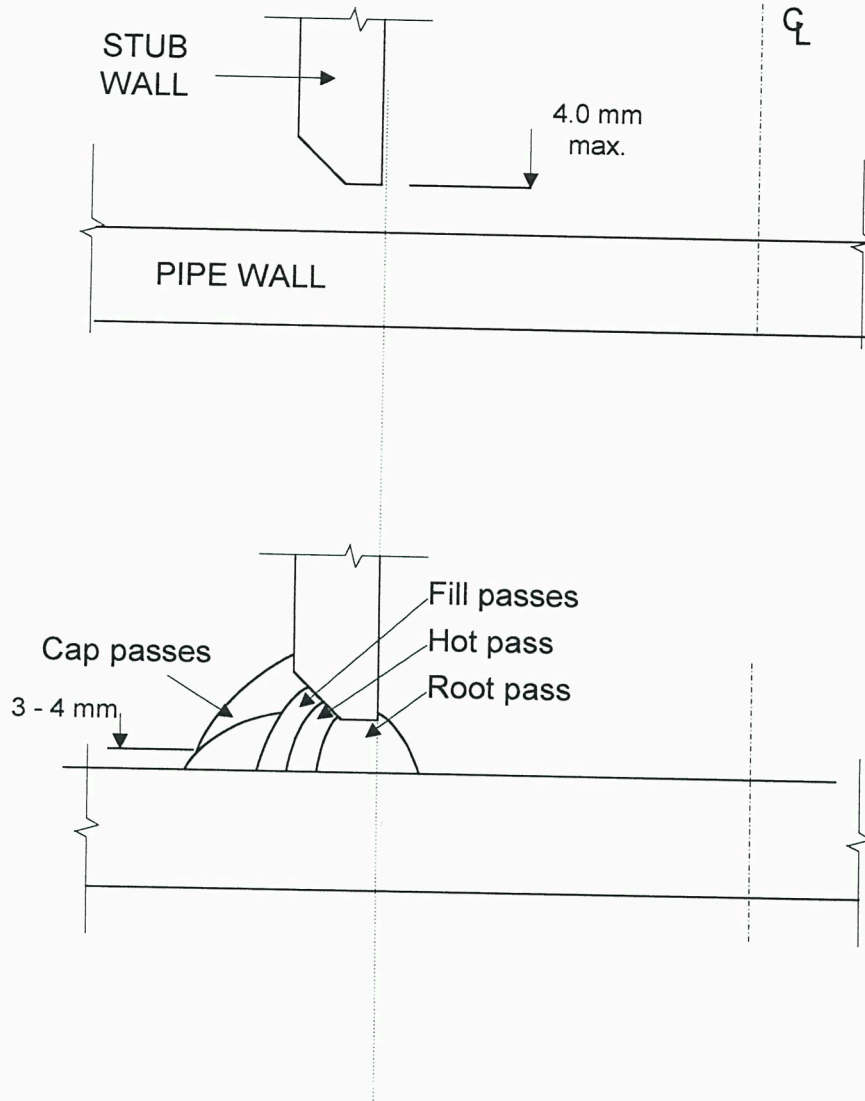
WELDING DETAIL & SEQUENCE – PRESSURE CONTAINING SLEEVE
